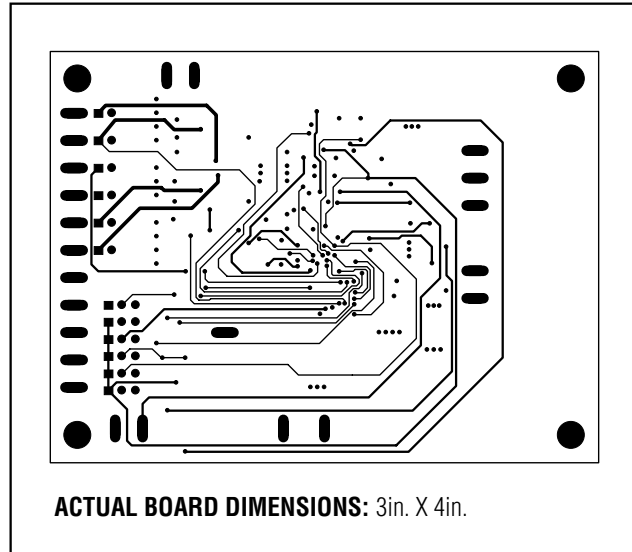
MAX1802 EV Kit PC Board Layout—Solder Side
